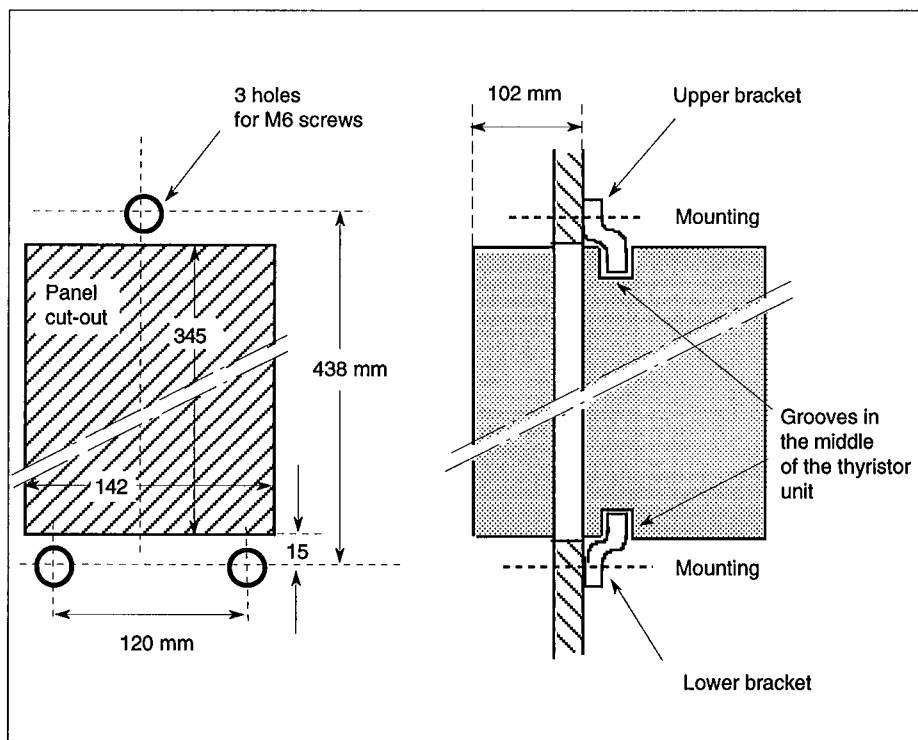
TU1450 thyristor unit drilling, cutting and mounting values
